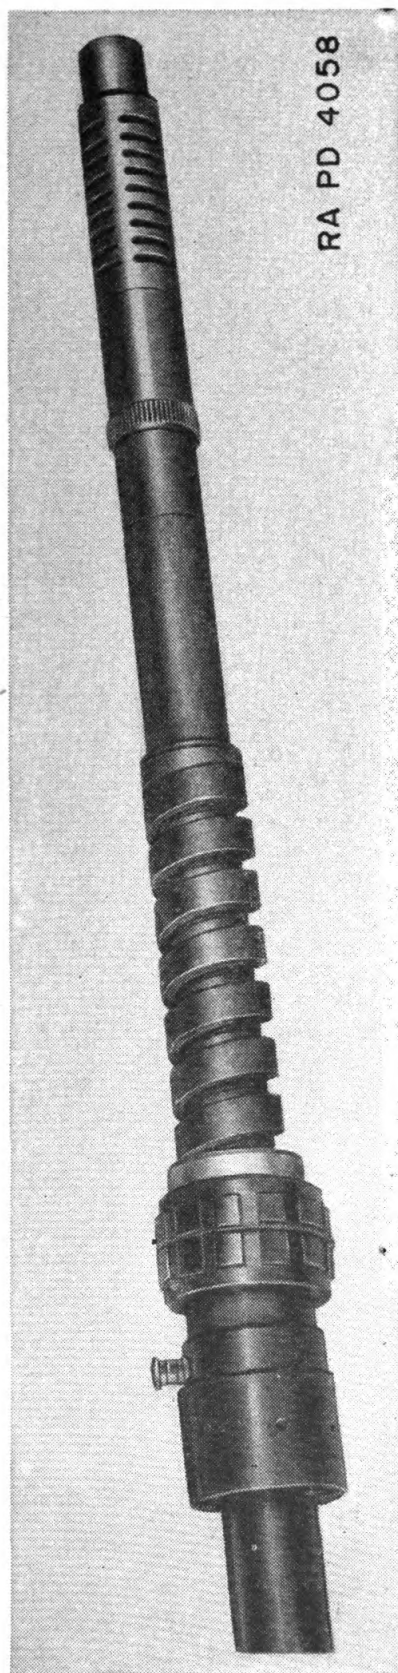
20-mm automatic gun M2, recoil mechanism assembly, close-up.
